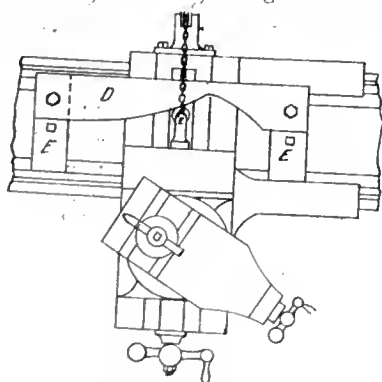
TURNING JIG FOR LARGE SHELL CUTTERS.
